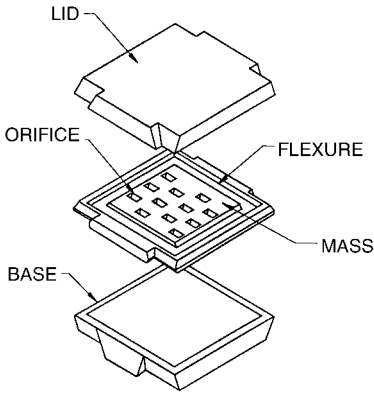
Exploded view of a micromachined capacitive accelerometer with a trampoline-like seismic mass mechanism.
